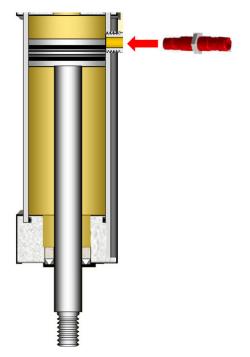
Tailgate Raise or Top Door Cylinder Fully Collapsed
